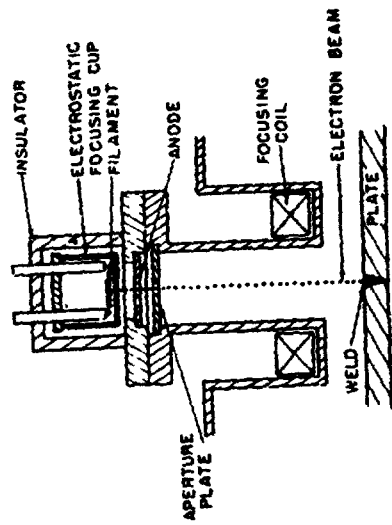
Sketch Showing the Elements of an Electron Beam Welding Gun
